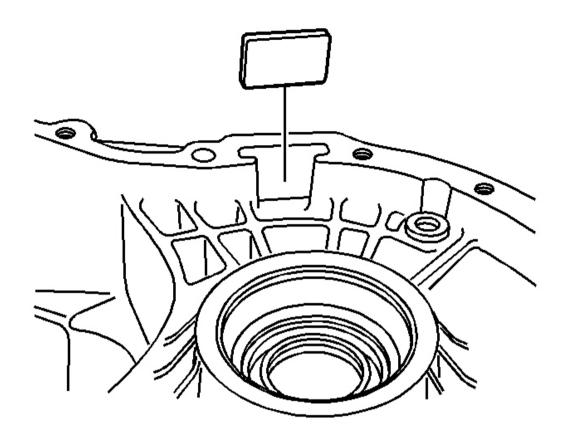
View Of Transaxle Magnet Courtesy of GENERAL MOTORS CORP.
